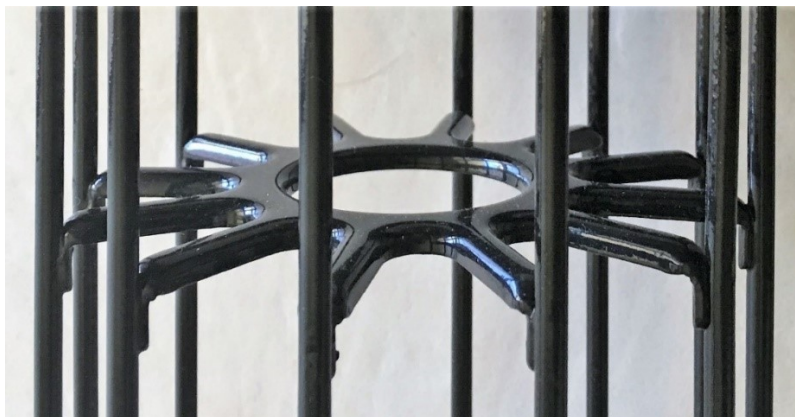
Previous 12-pleat ESB design [6] with pressed metal component cage.
